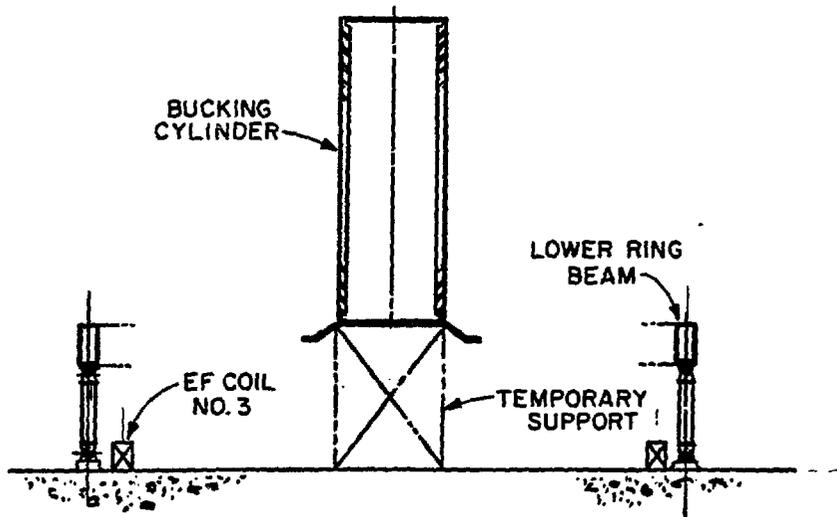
Initial assembly of the FED device - installation of temporary support bucking cylinder, EF coil #3, lower ring beam.
